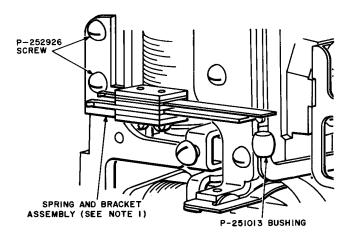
Vertical Interrupter Spring and Bracket Assembly and Associated Parts Used With Vertical Armature Assembly Having Vertical Armature Arm
